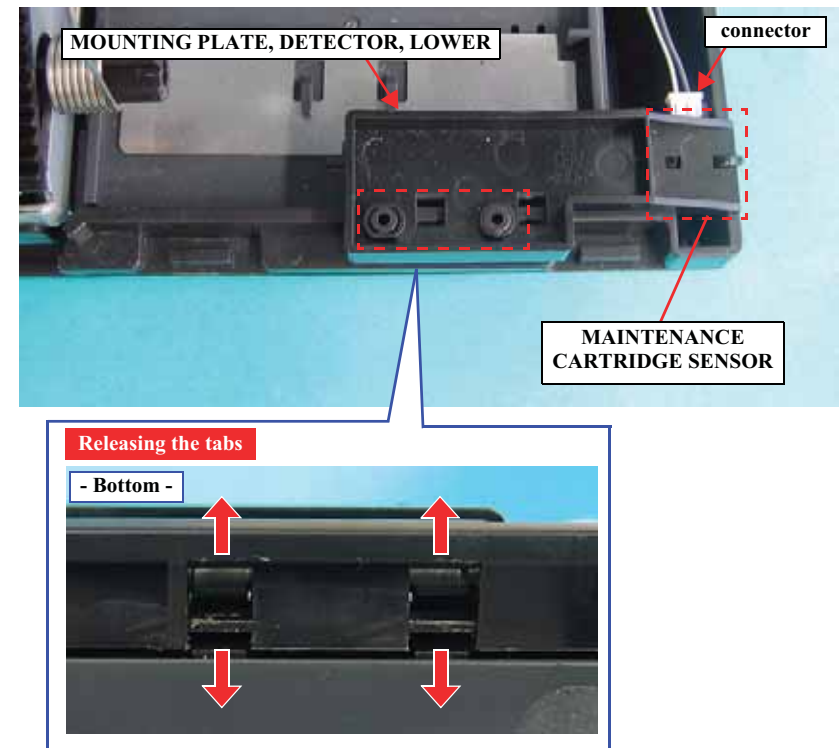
Removing the MOUNTING PLATE, DETECTOR, LOWER
